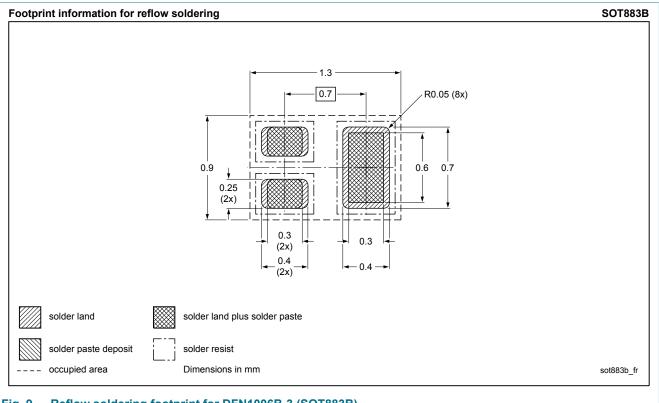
Reflow soldering footprint for DFN1006B-3 (SOT883B)
